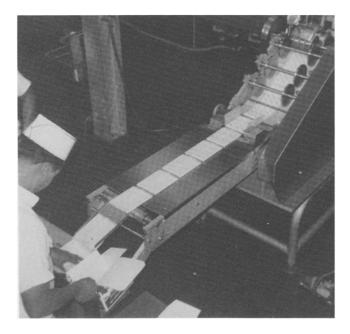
New sheeting and wrapping machine handling 5 x 6 in. margarine chips at 2400 lb. per hr.
